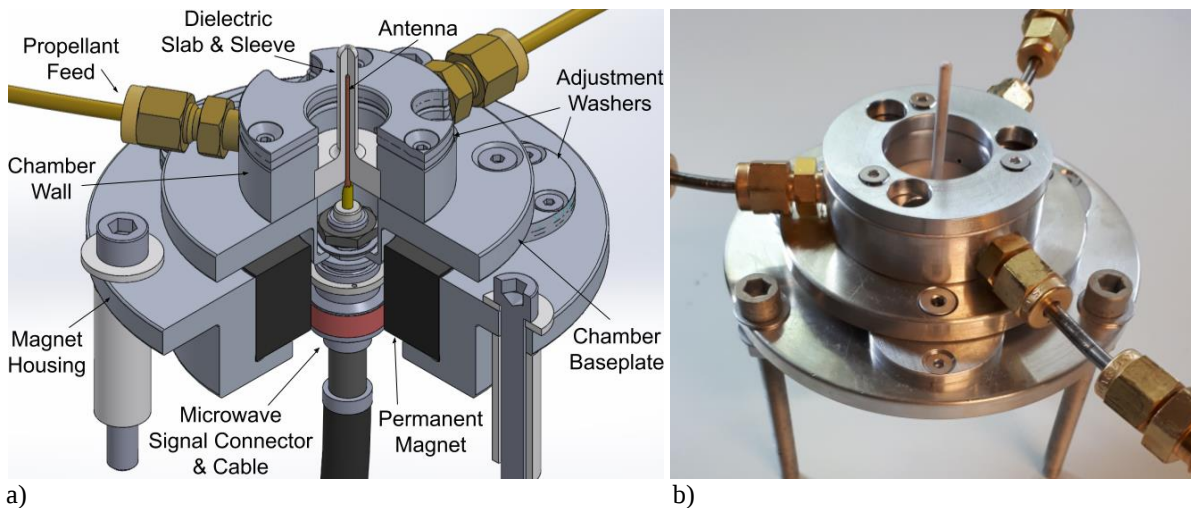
a) Cutaway view of the AQUAJET thruster 3D model, highlighting the main thruster components. b) Photograph of the AQUAJET thruster assembly.
